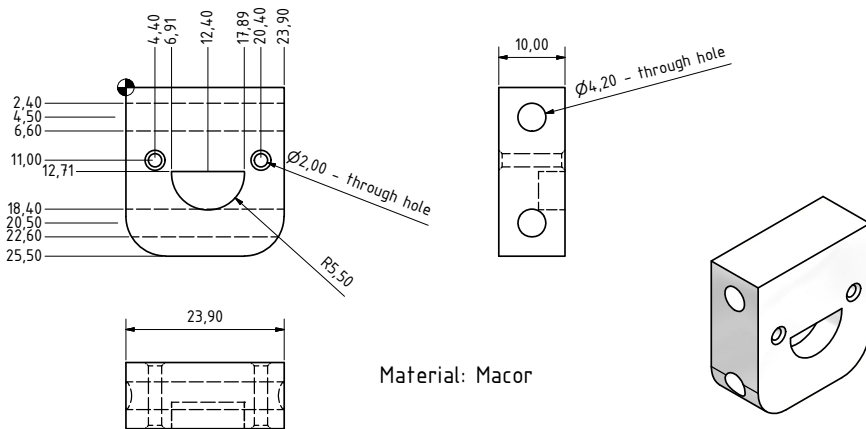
Drawing of the Macor endcaps for the side heaters.
